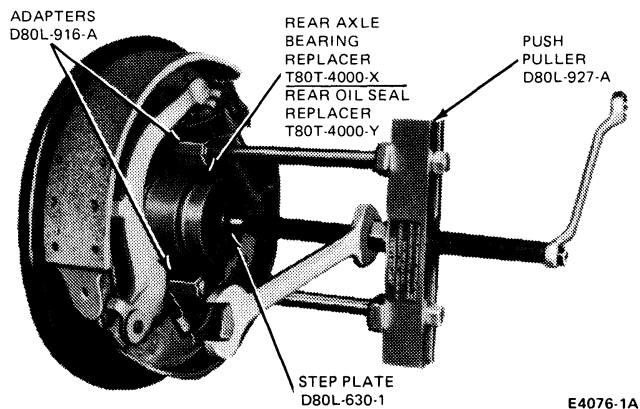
Installing Rear Axle Bearing/Rear Oil Seal Dana Model 60 Semi-Floating Axle
